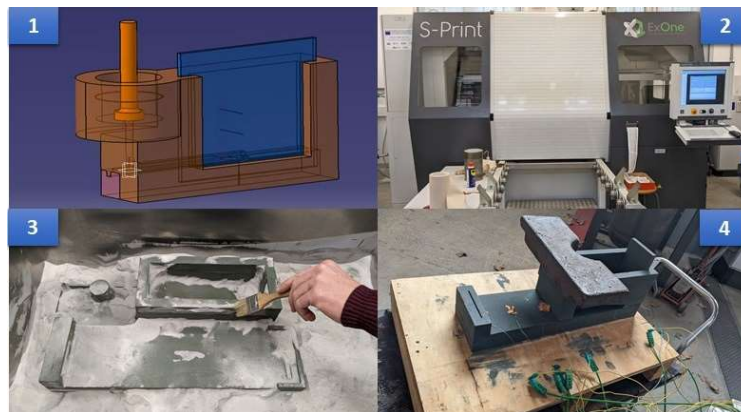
Four main steps of resin - bonded sand molding using 3DP: 1) Design 2) 3DPrinting machine 3) De-molding 4) Instrumentation
